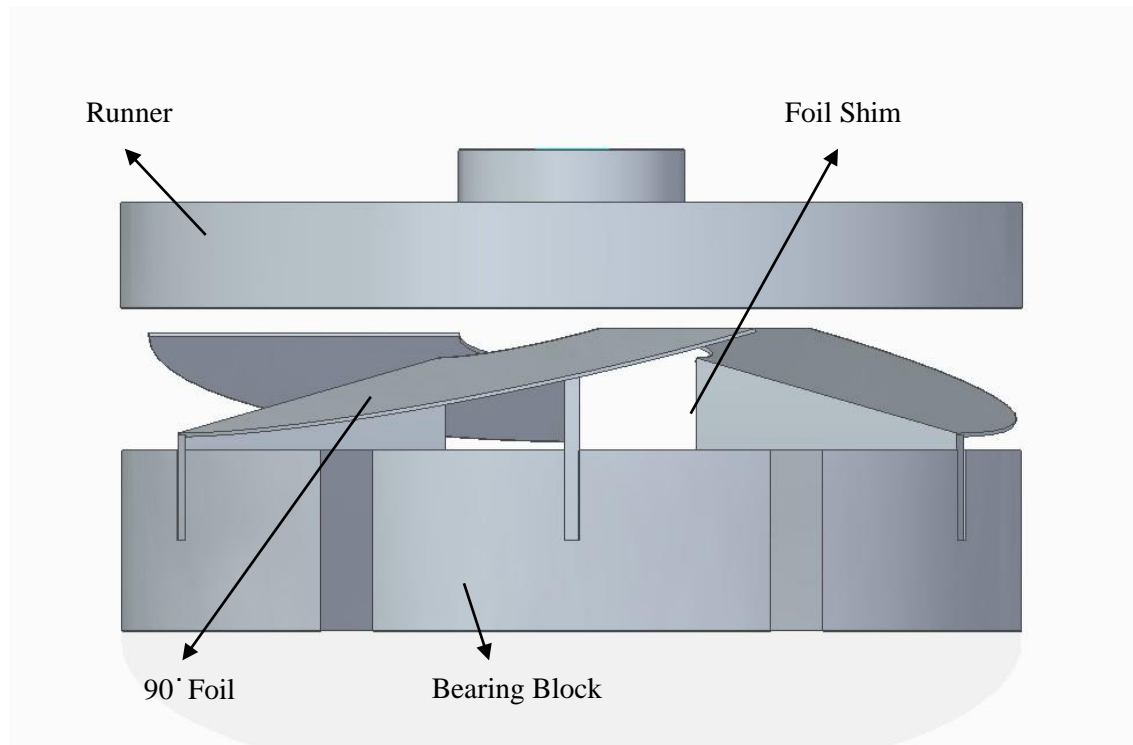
3D CAD Model Assembly of Bearing Block, Runner and 90 Degree Sector angle Foils
